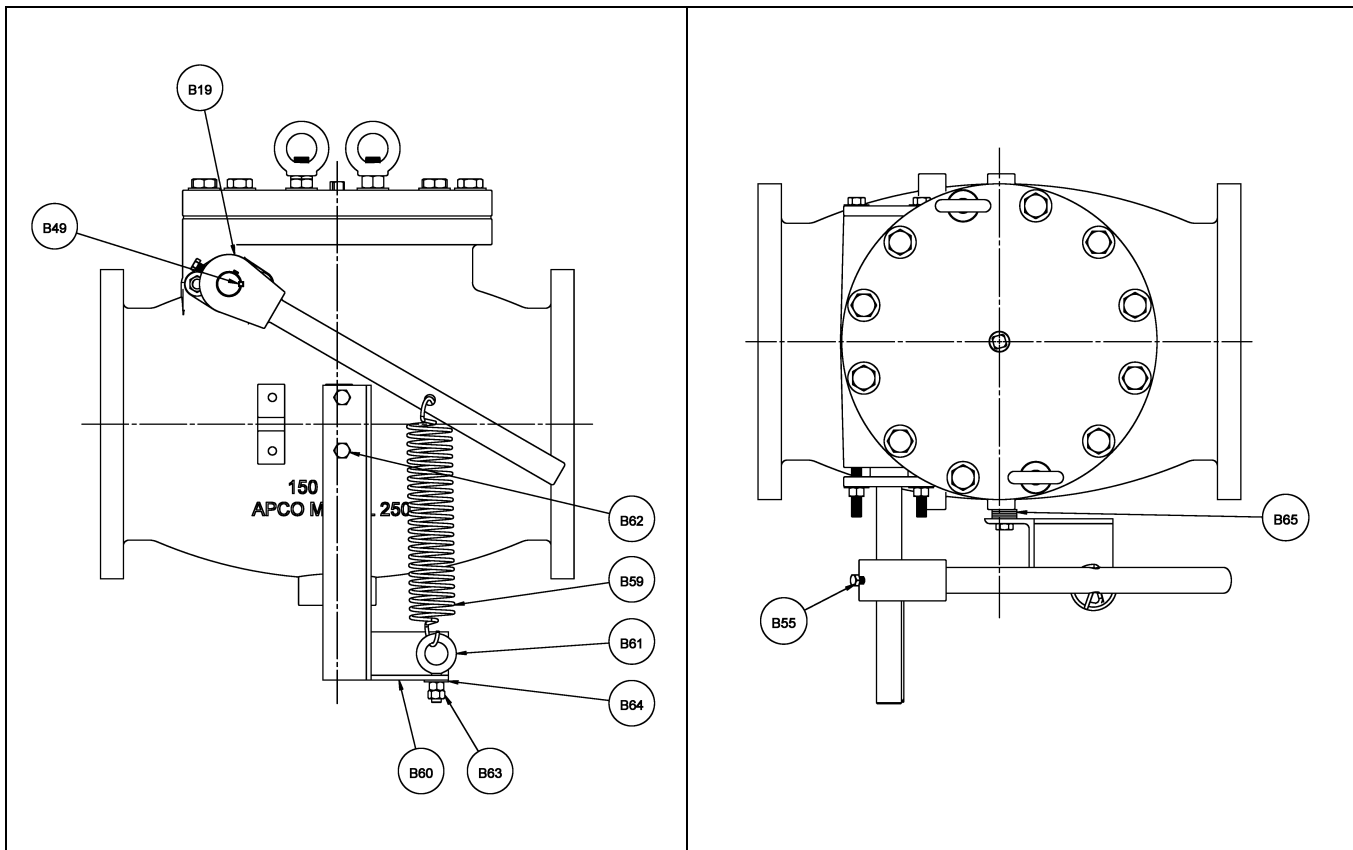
CVS-250/250A Swing Check Valve (Lever & Spring)
